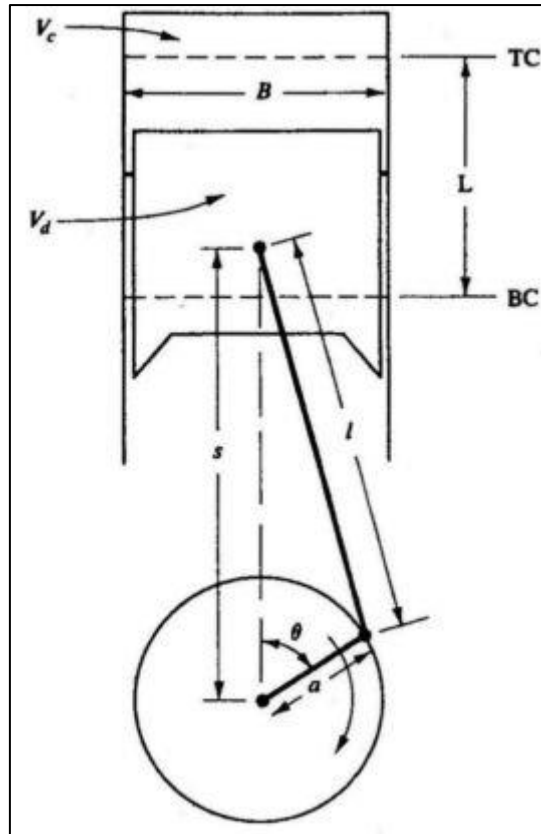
Basic geometry of the reciprocating Diesel combustion engine.
